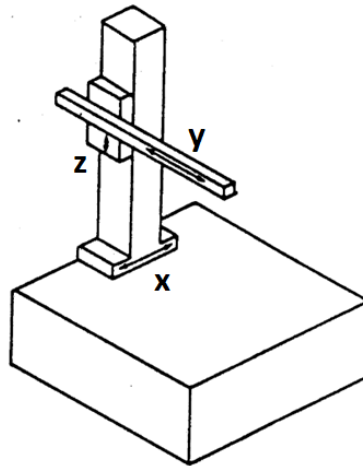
Sketch of a horizontal arm CMM [5]
